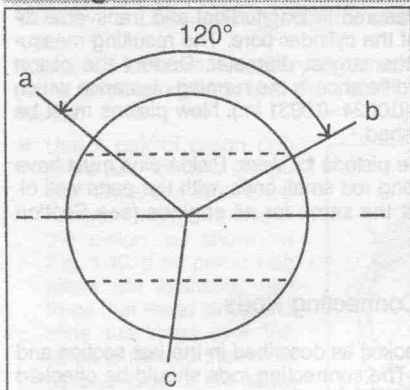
Correct arrangement of the piston ring gaps.
